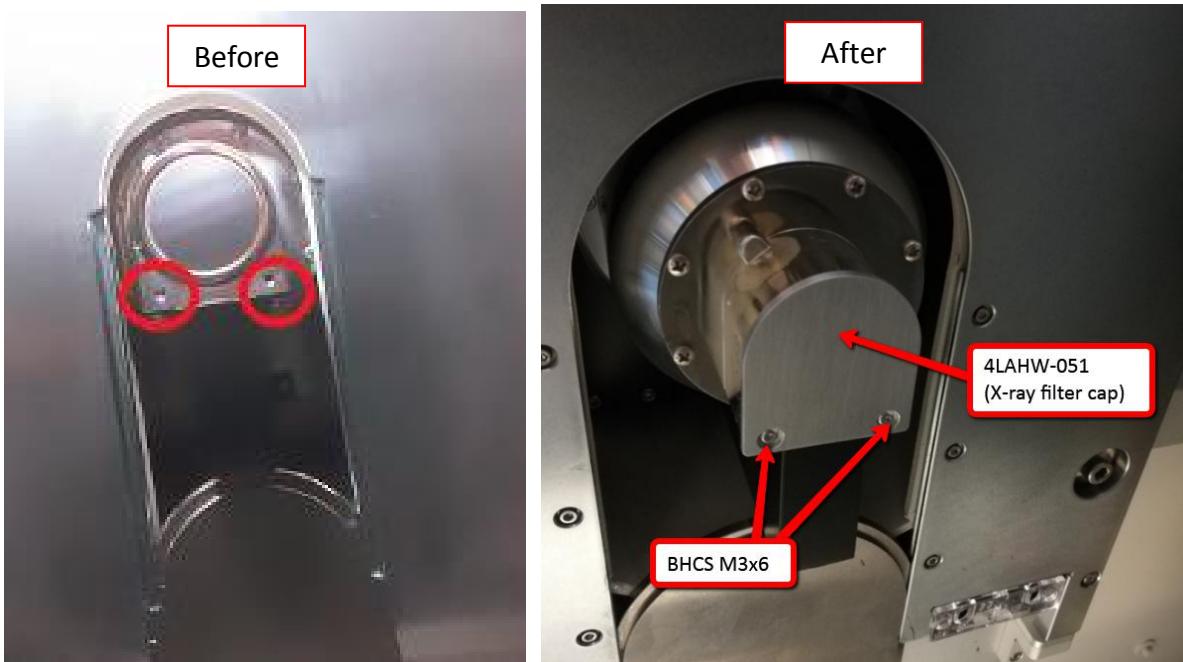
X-ray tube bottom view (before & after filter cap installation)
